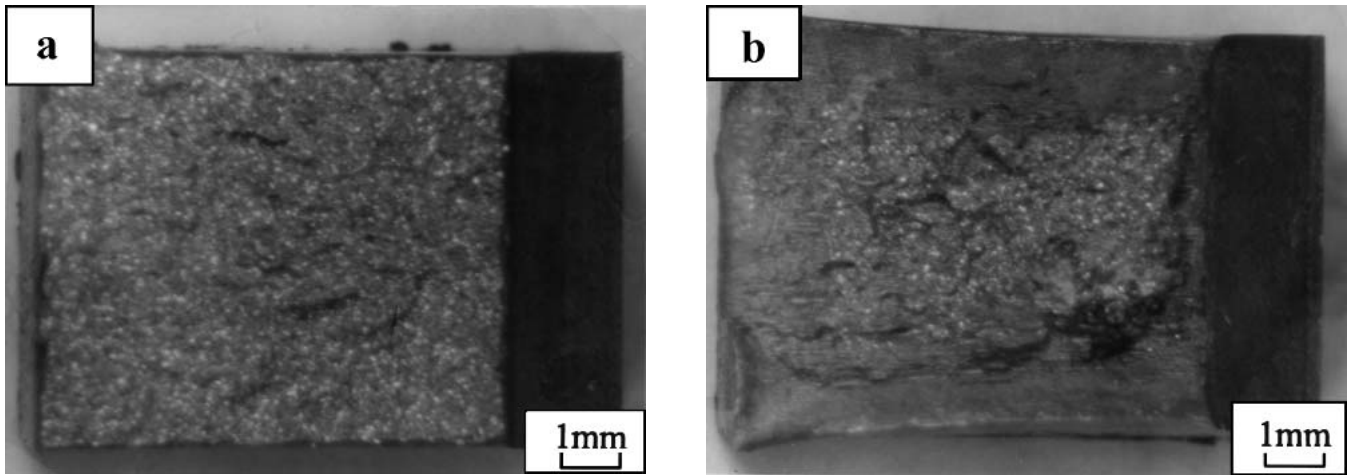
Macroscopic photographs show the impact-fractured appearance of the 538 °C tempered (a) steel plate and (b) laser-hardened specimens.
